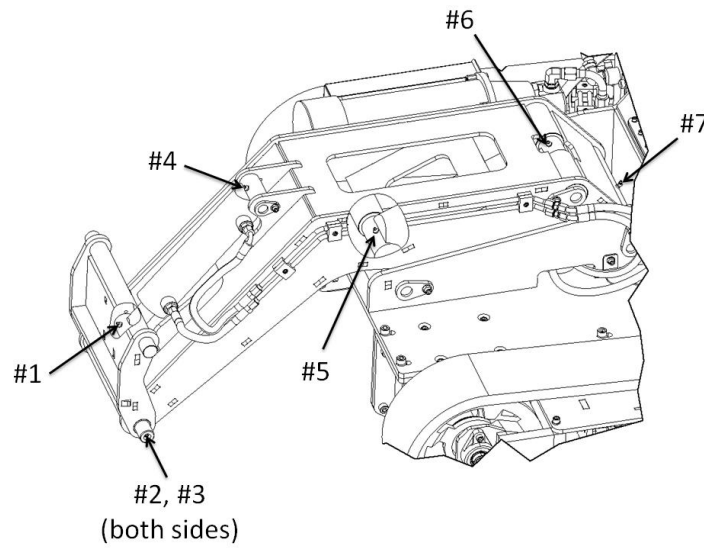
Pivot grease fittings locations (bucket removed for clarity)
